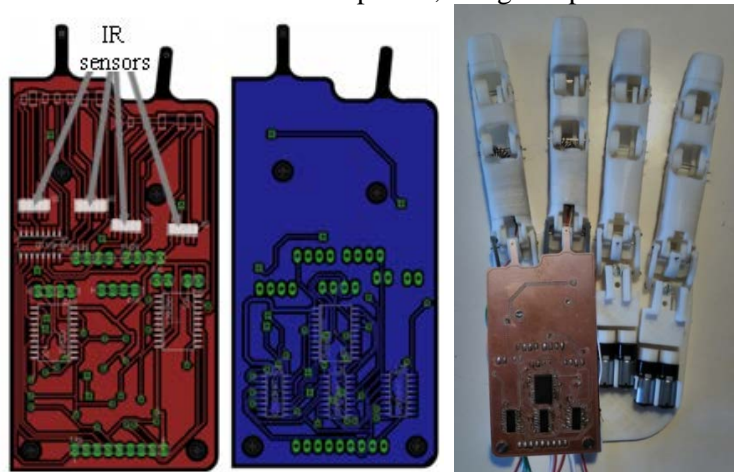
Controller board A) Bottom. B) Top. C) Controller board on hand structure.
